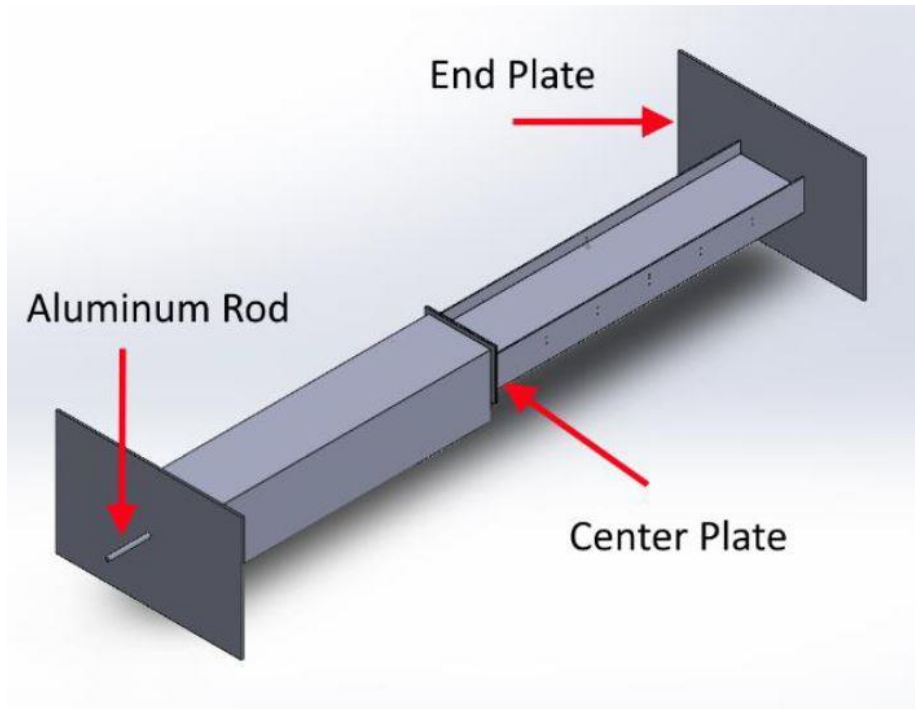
CAD drawing of Hybrid section (Rectangular and 'H' sections) assembly
